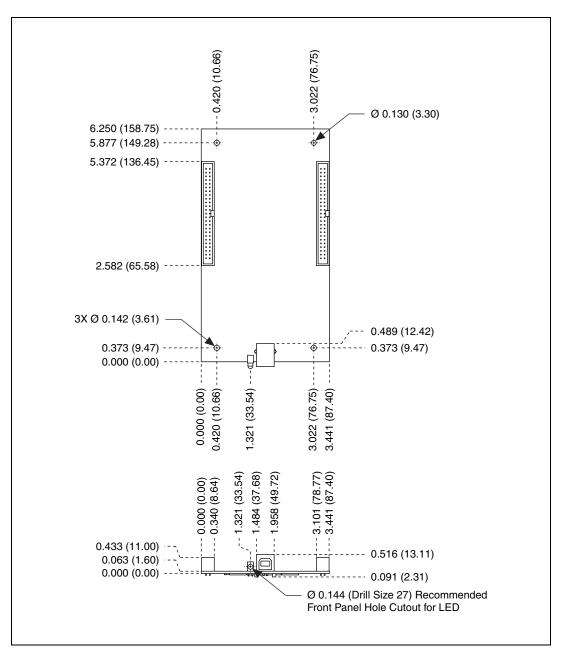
USB-6212/6216/6218 OEM Dimensions in Inches (Millimeters)
